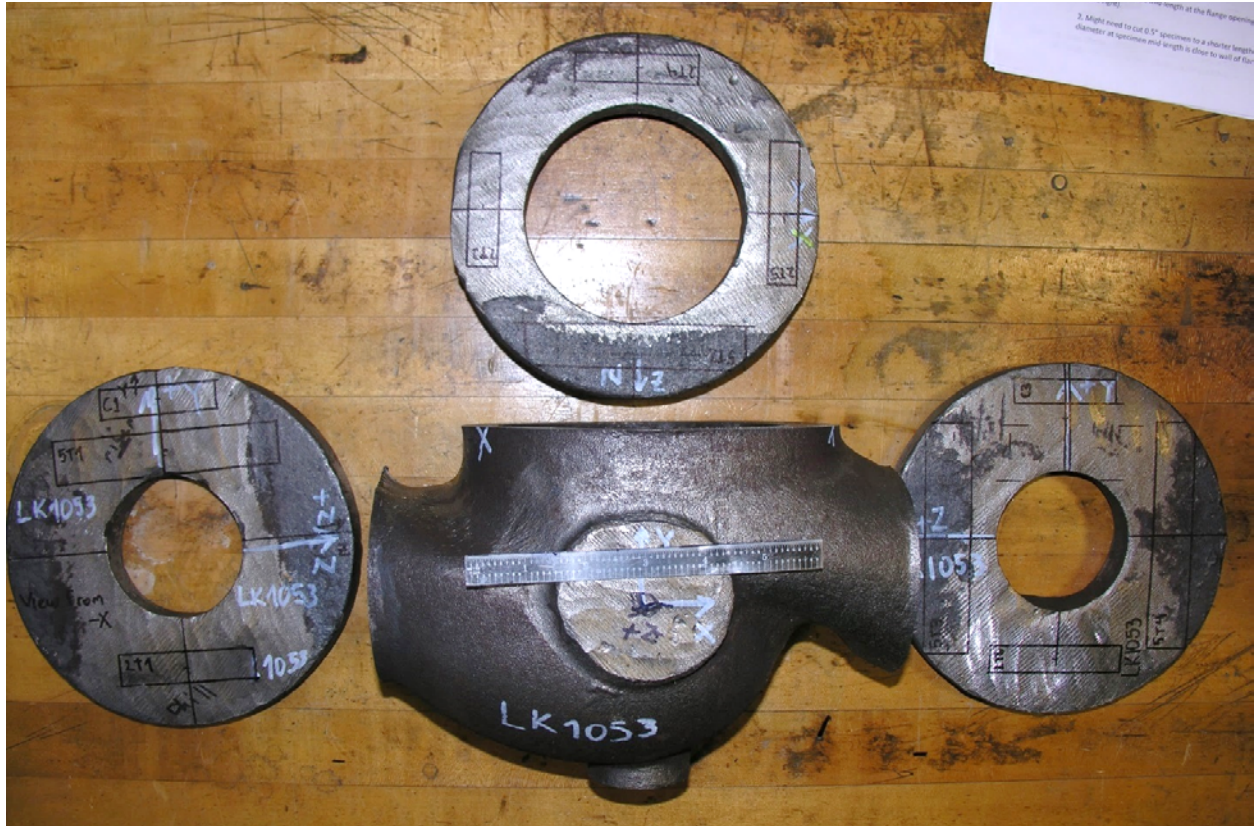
Shows the casting with flanges cut off and the location where the test bars will be pulled from
